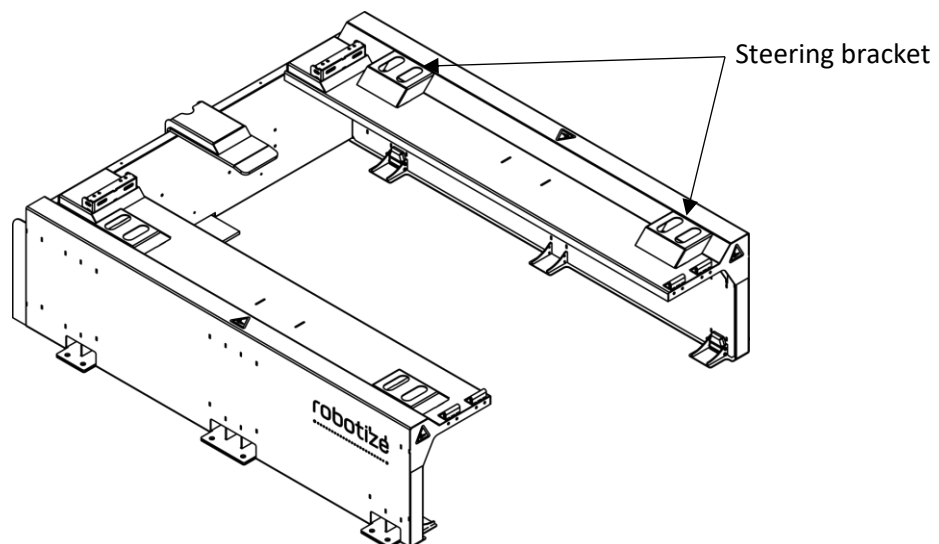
GoPal Pallet Station (EW) with steering brackets mounted
